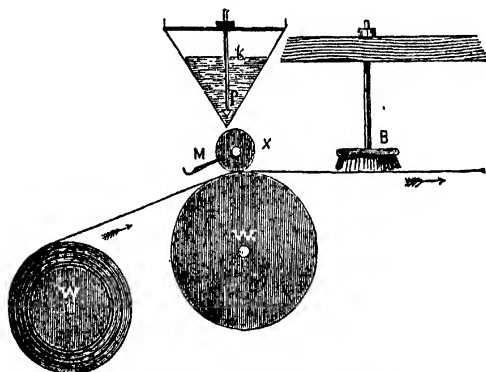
Machinery for Spreading Tar Tarpaulins.
